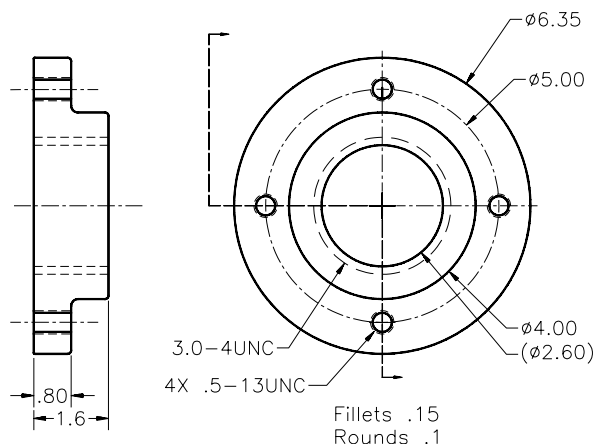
Drawing for Exercise 12: draw the left side view in section
